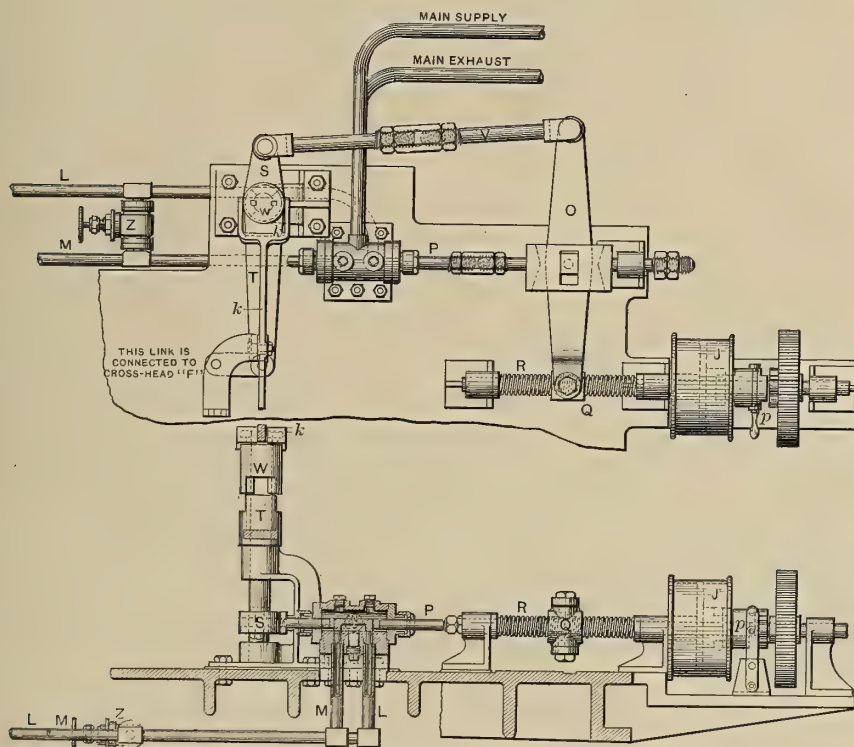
THE CONTROLLING GEAR OF THE U. S. CRUISER "OLYMPIA'S" STEERING MACHINERY.
